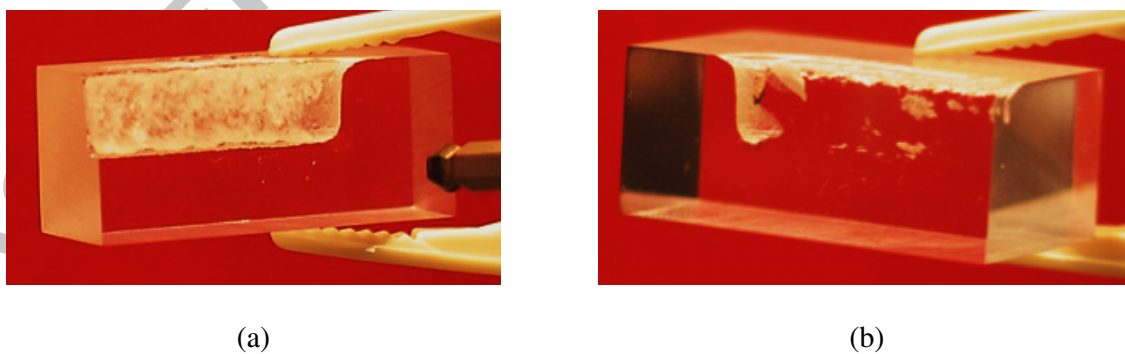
Longitudinal tool 1 samples displaying the retreating (a) and the advancing (b) side
